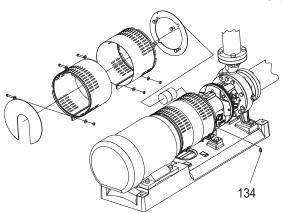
Back pull-out assembly removal (oil lubricated bearing frame)
